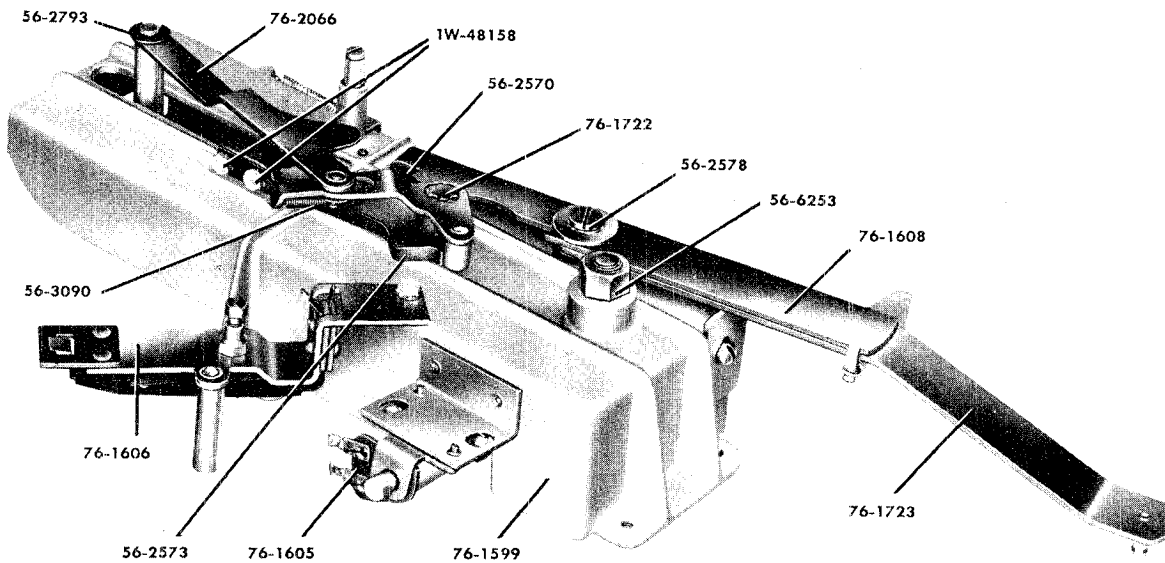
CHANGER MECHANISM ASSEMBLY, UNDERSIDE VIEW.
